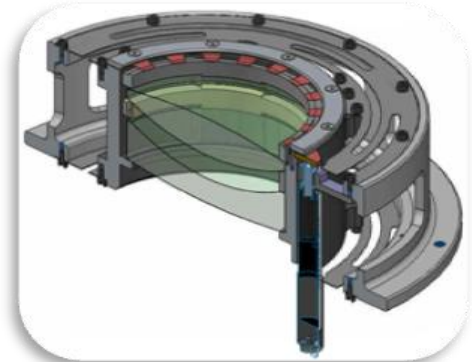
REI-L-3/4 ortho-planar focusing mechanism.
